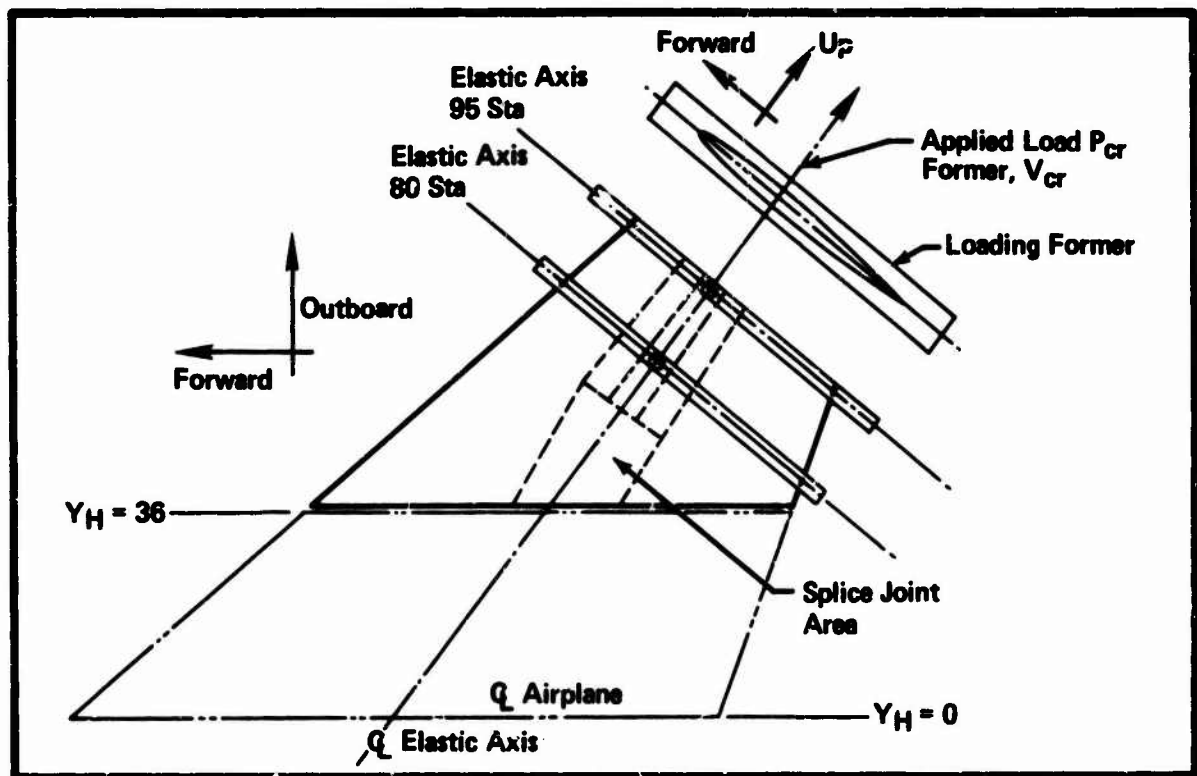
Horizontal Stabilizer Inboard Splice Joint Test Loading
